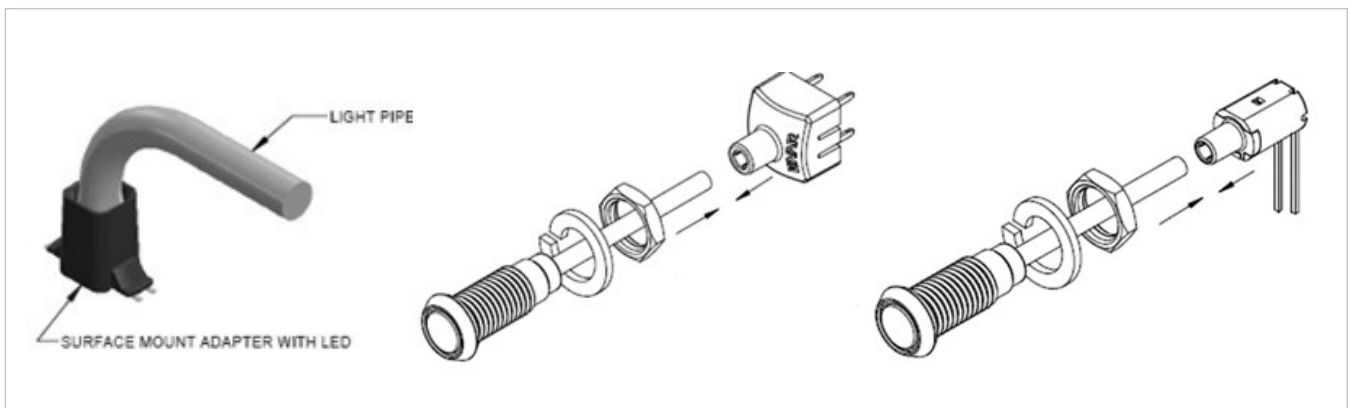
Solder-on, board-mount rigid light pipe (left) slides into the hole in the front panel, providing minimal ingress protection, while flexible light pipe versions (center and right) can be equipped with gaskets and seals.
